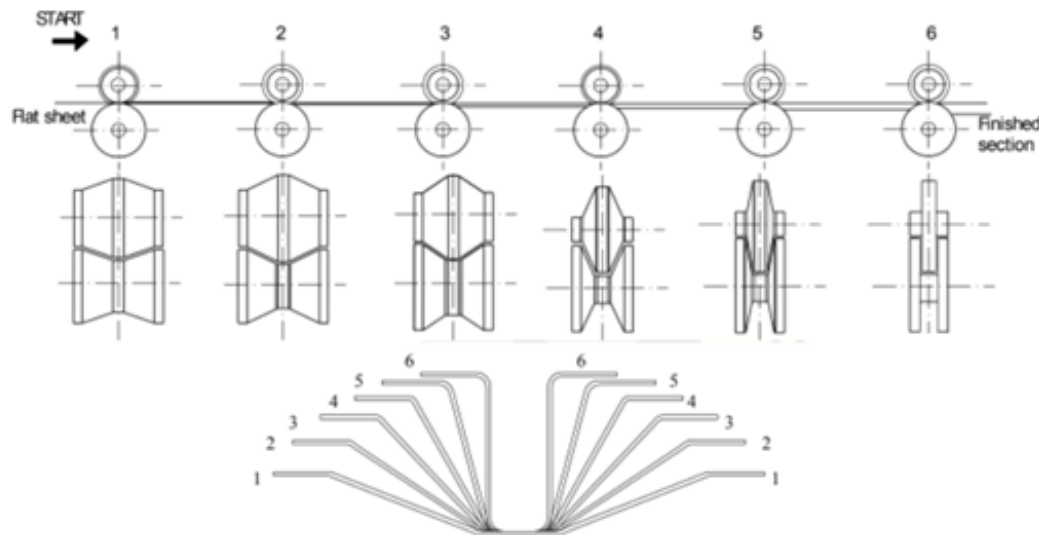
Cold-Formed Steel Manufacturing Process [11]
